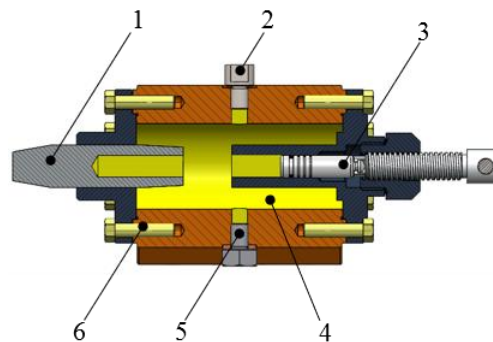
Structure of the impact energy measurement device using the pressure sensing principle. 1-plunger; 2-oil plug; 3-regulator; 4-oil tank; 5-oil drainage hole; 6-bolt.
